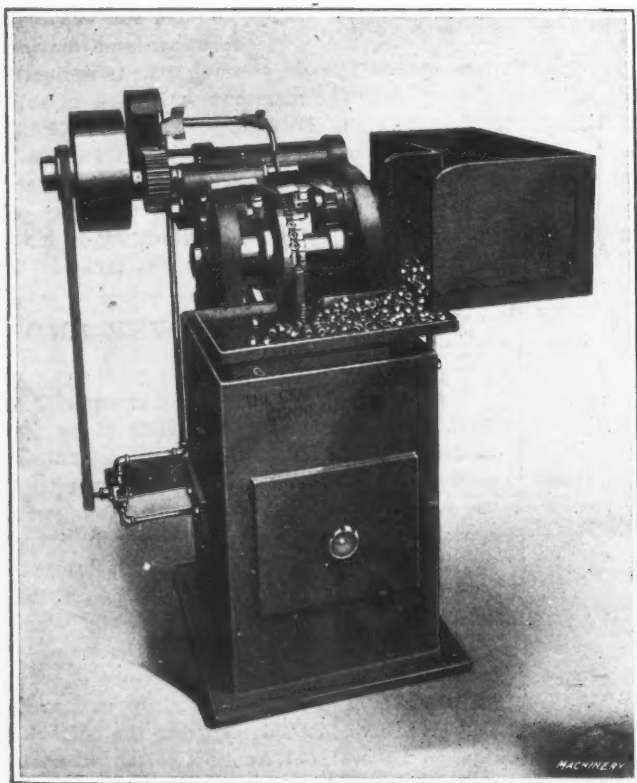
Craftsman No. 1 Continuous Rotary Milling Machine
